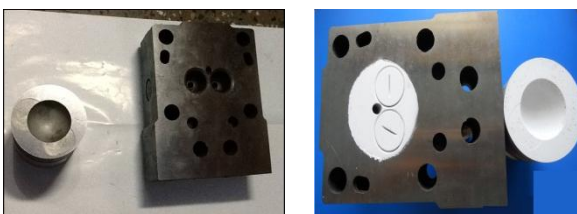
Picture of stock and Alumina coated Piston and Cylinder Head
